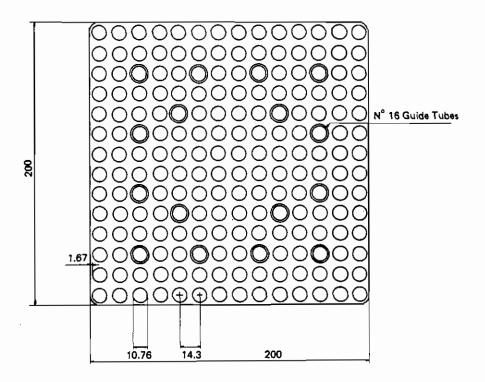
Horizontal cross section of the fuel assembly. (All dimensions are given in mm).
